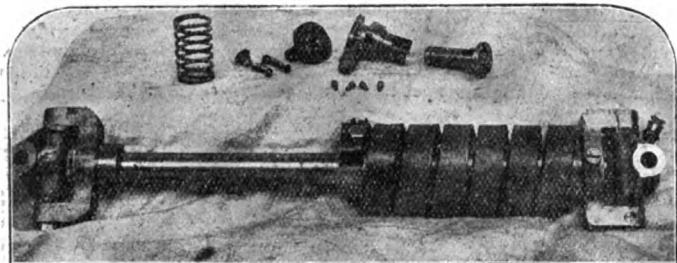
The Albion spring drive between the engine and clutch. In the illustration are also shown the parts of the special air pump employed to maintain the pressure in the petrol tank.
